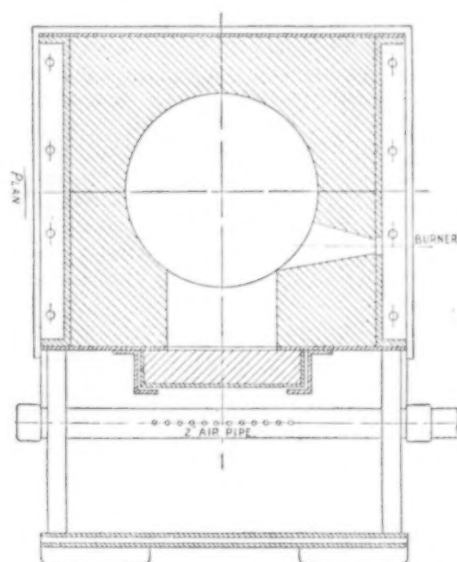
ROTOFLAM TOOL HARDENING FURNACE (SECTIONAL VIEW)
